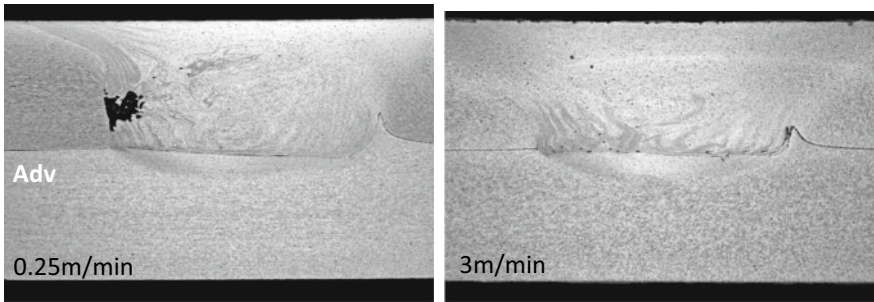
FSLW made between 5754 (2.5 mm) and 5754 (2.5 mm) sheet at 1950 rpm using identical tooling at the welding speed of 0.25 m/min and 3 m/min
